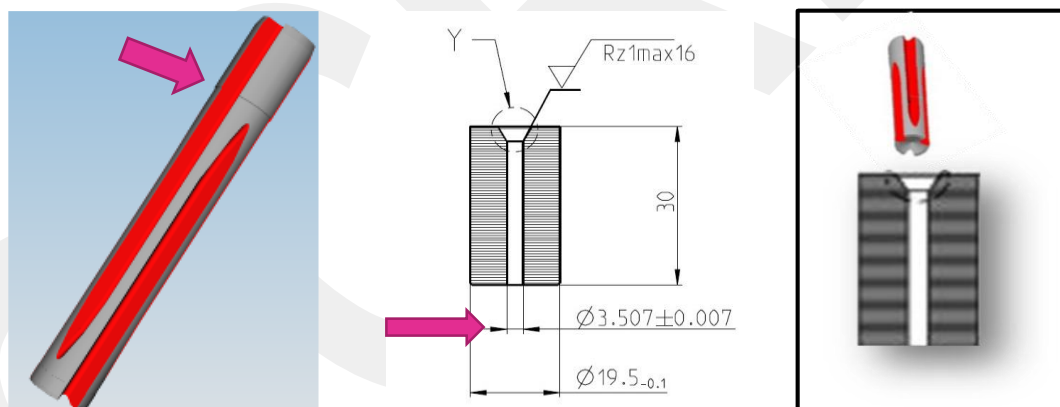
Dimensions of the filter and tube (Grooved Geometry)
